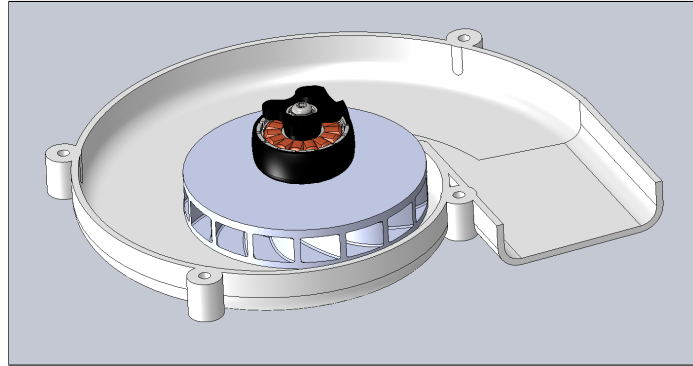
Impeller Assembly. The top half of the volute casing is removed so that the impeller and BLDC motor can be shown.
